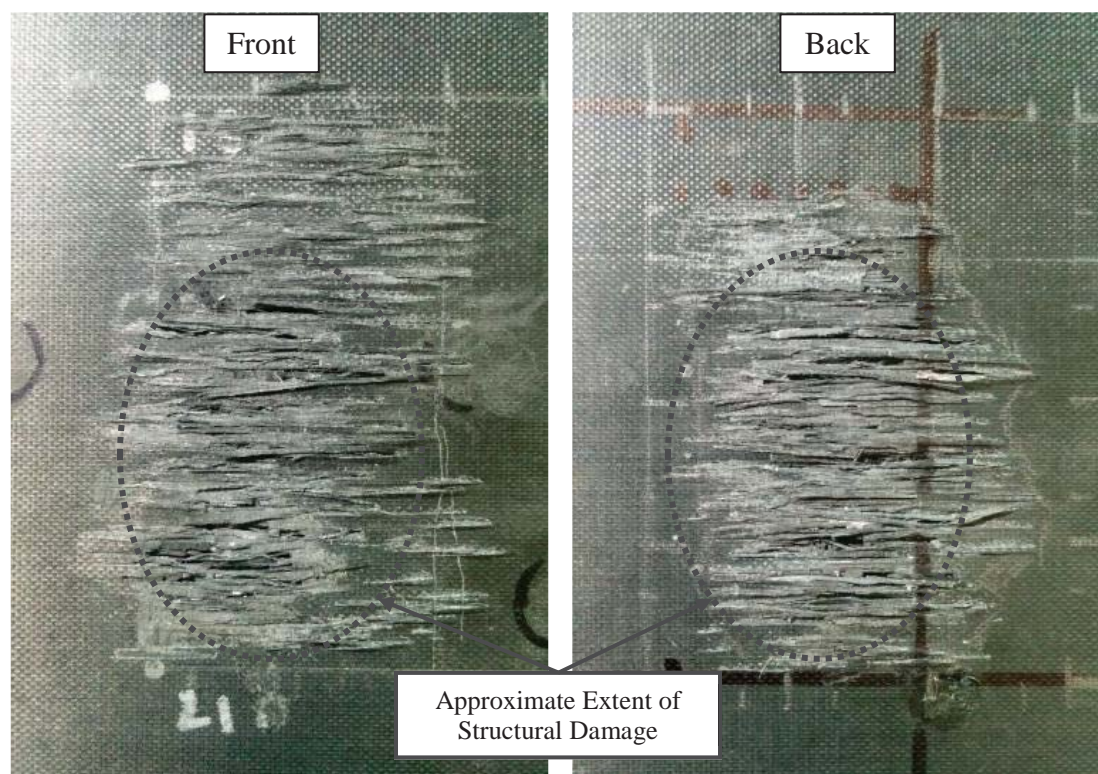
Close-up views of damage in experimental composite plate test-piece.
